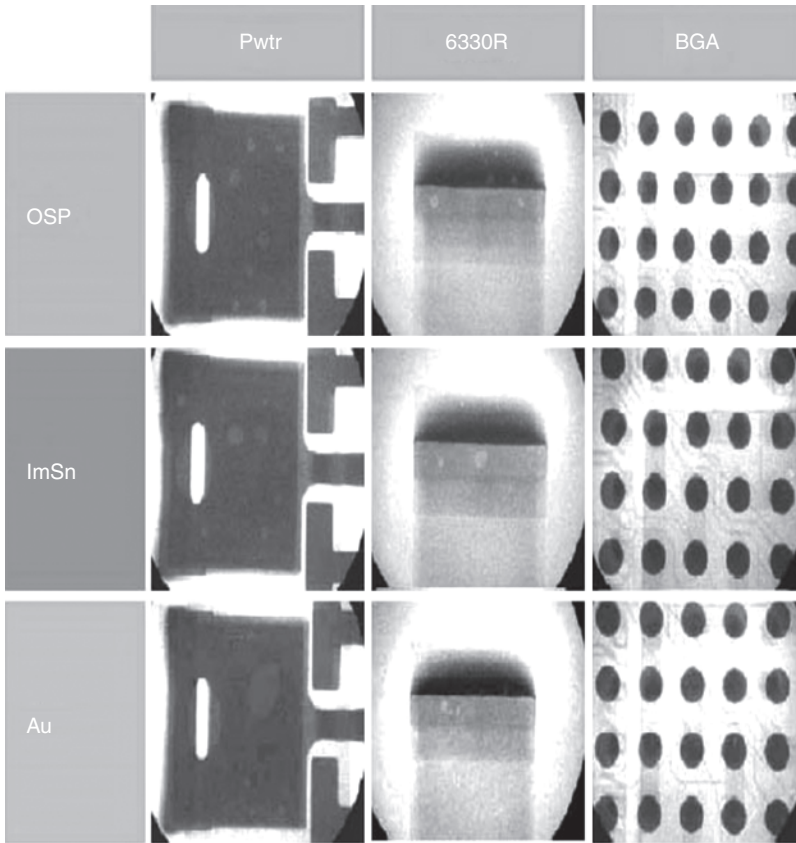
Example of power transistor/BTC, chip, and lead-free Sn3Ag0.5Cu BGA component solder joints soldered with lead-free Sn0.7Cu1.1Ag0.06Ni1.8Bi solder for three different board surface finishes (organic solderability preservative, immersion tin, NiAu) under X-ray inspection [4].
